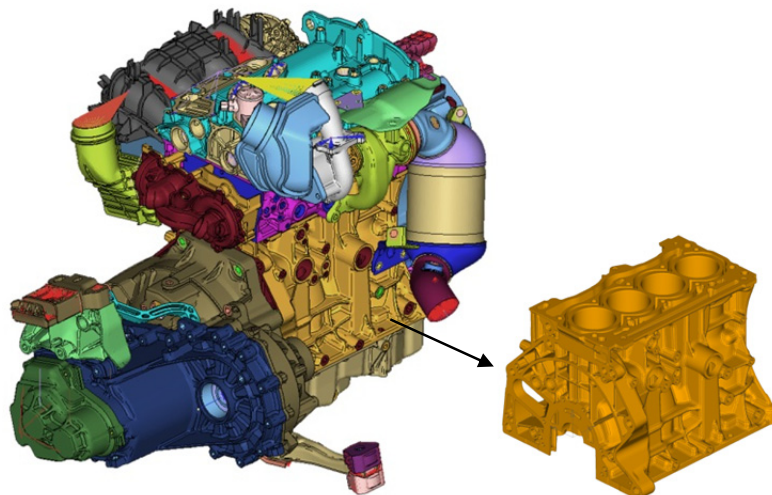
SI engine (left) and cylinder crankcase (right) [IAV]
